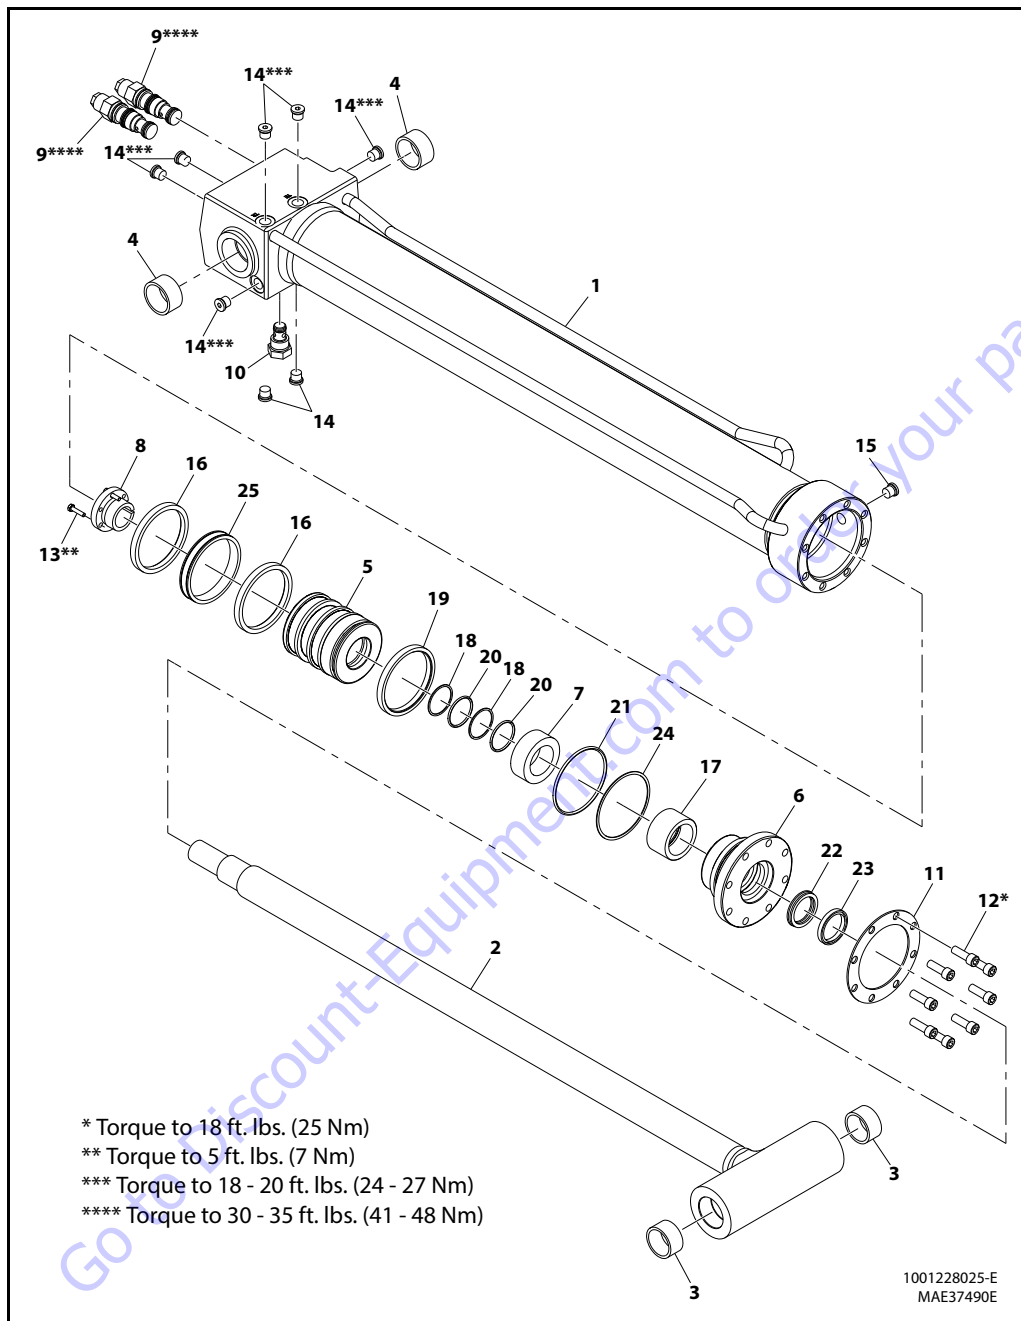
Main Boom Lift Cylinder (0300239977 to Present)
